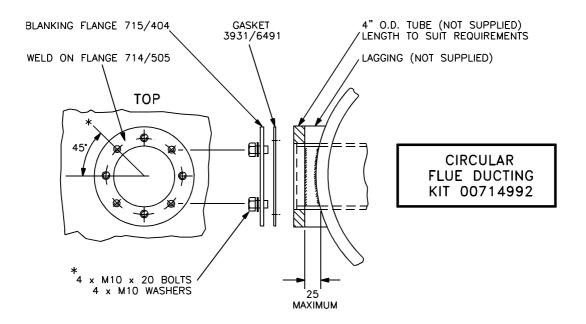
B Mounting Flange Orientation - Circular Flue Ducting
